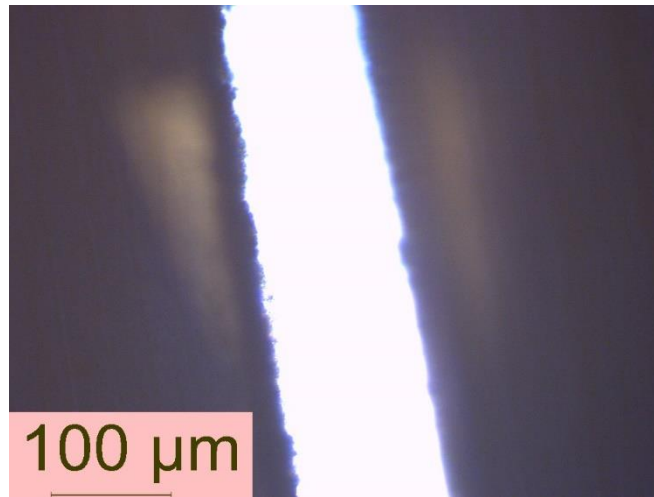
Zoomed in View of Cut on Aluminum Foil
